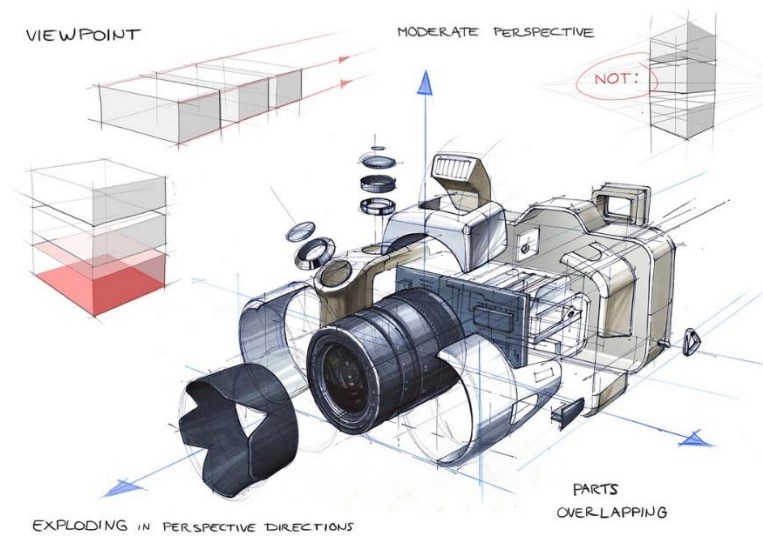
Exploded view of a camera (Delft Design Drawing website, n.d.)
